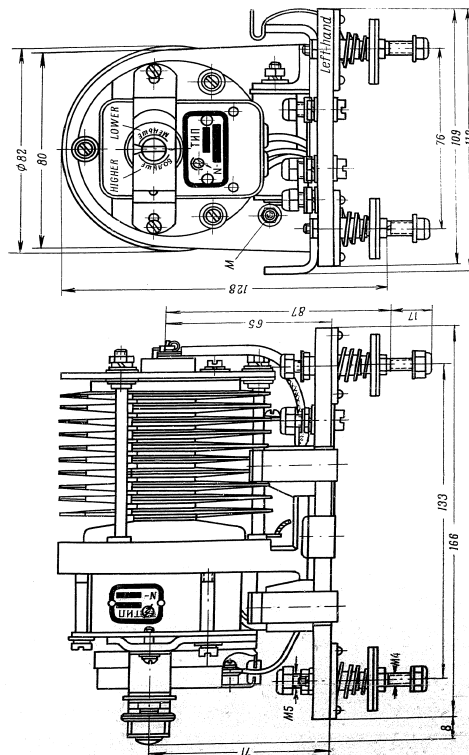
Overall Dimensions of P-27 Regulator with Shock Absorbing Panel (left-hand)
